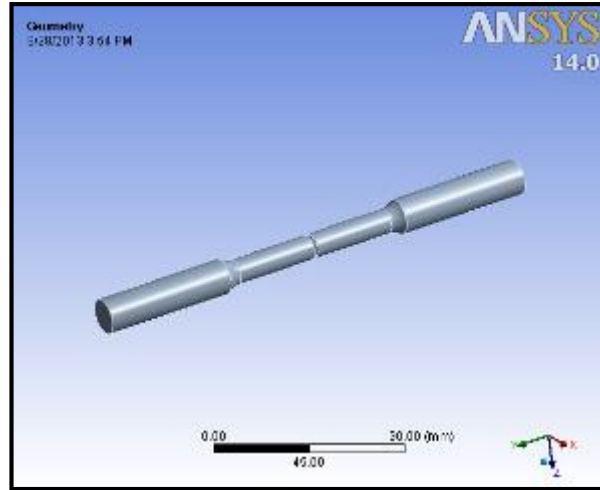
3- D drawing of the full size fatigue test specimen.
